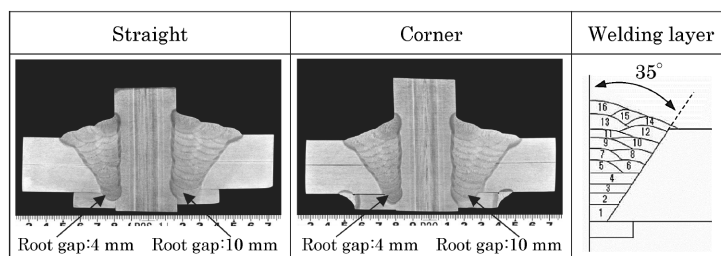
Cross-sectional macro comparison [F] MG-56R(A) welded joint and welding layer
